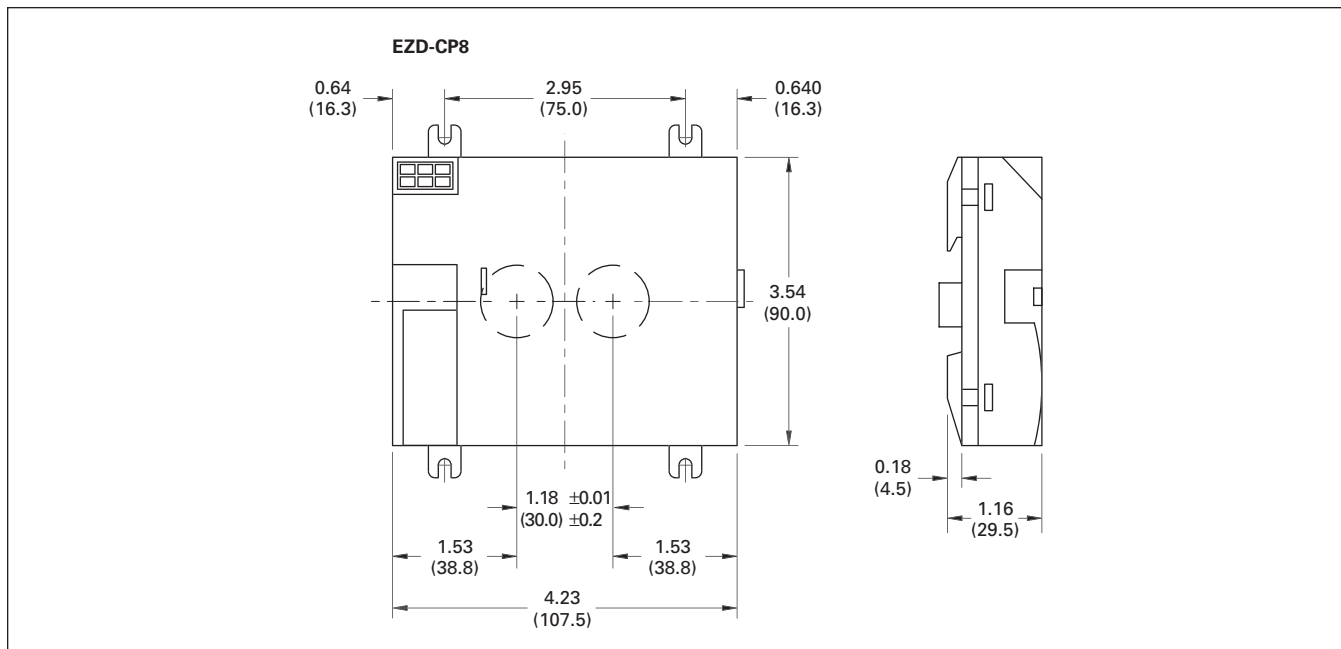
EVD-CP8 Series Dimensions in Inches (mm), Drawing Number MD05013006E
